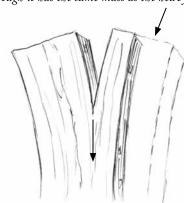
Splitting unequal-sized parts can be tricky.
